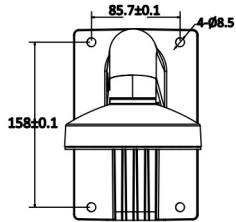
Dimension of Demonstrated Wall Mounting Bracket
